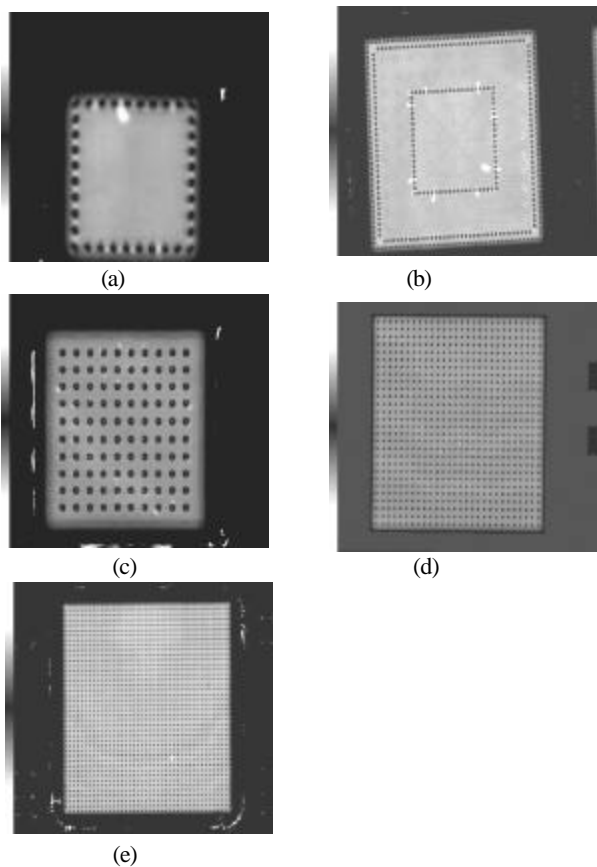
C-SAM images showing effect of various bond pad design on void (a) Slot (b) Slot (3 row) (c) Pad define (d) solder mask define (e) pre-solder.
